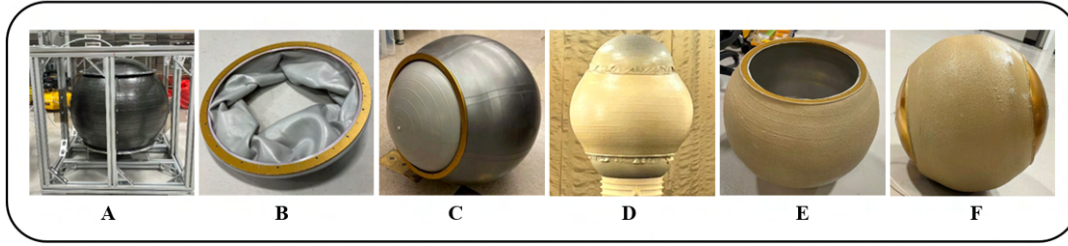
Illustration of RoboBall "Soft Shell" Manufacturing Process
